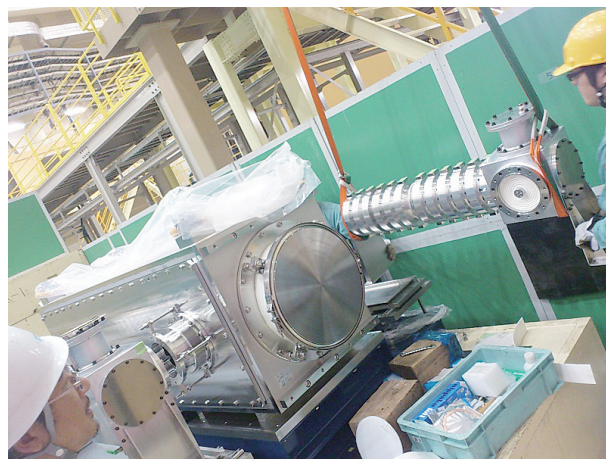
Assembling the electric kicker. One of the pulse transformers is about to be attached to the vacuum chamber.
